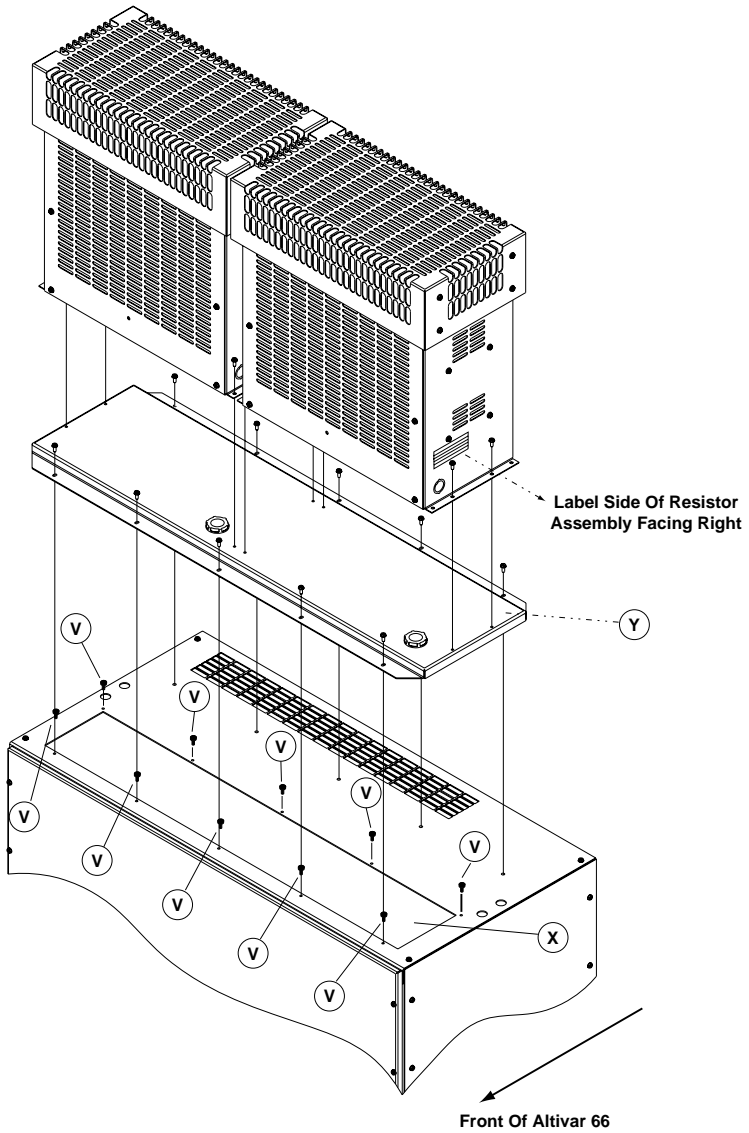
Mounting on ALTIVAR 66 Drive Controller: VW3A66717, 718
